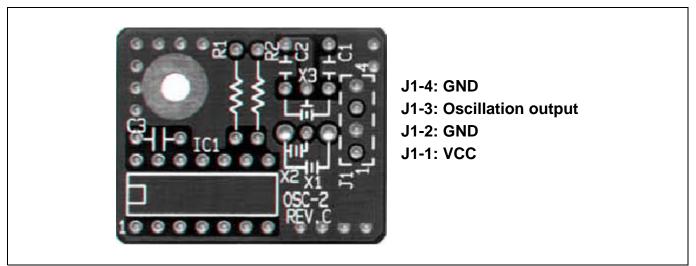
External view of the oscillator circuit board OSC-2 and its connector pin locations
